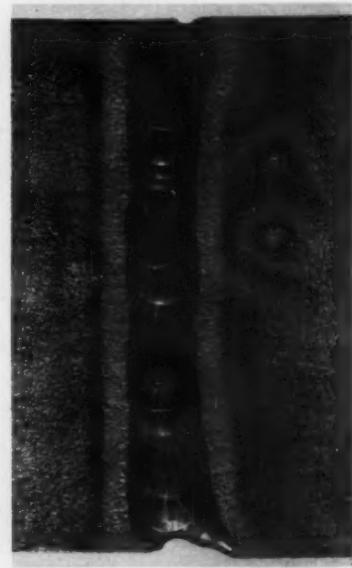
Less Cracking Occurred in Yttrium Weld When Sheared Strip of the Base Metal Was Used as Filler
